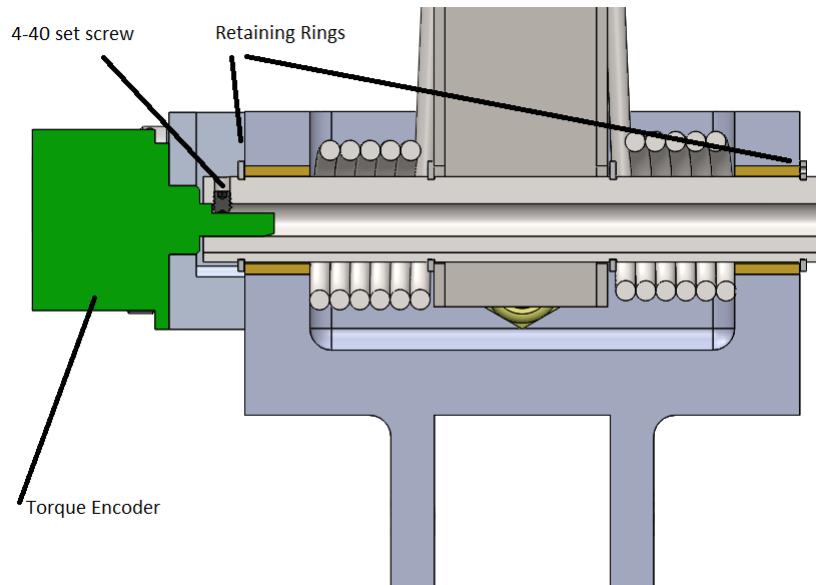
Side view of how the torque encoder connects to the pedal and measures the throttle
